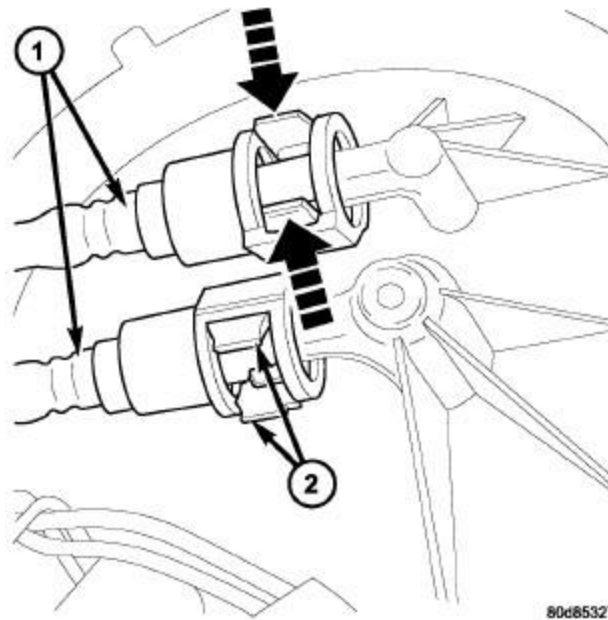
View Of Pinch Type Quick-Connect Fitting
